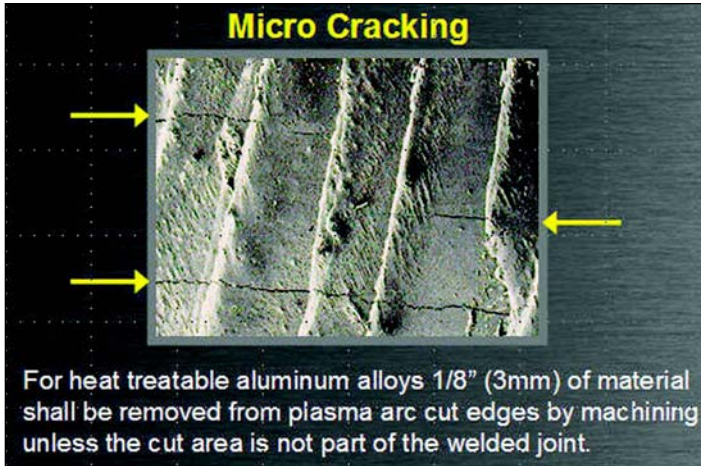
Micro Cracking at the Edge of an Aluminum Plate After Plasma Cutting
